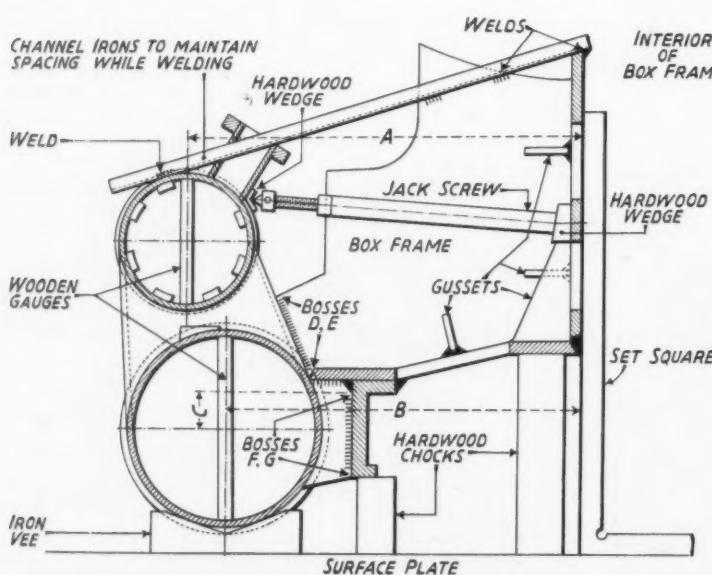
(left)—Cylinder, steamchest, and supporting frame mounted ready for welding
